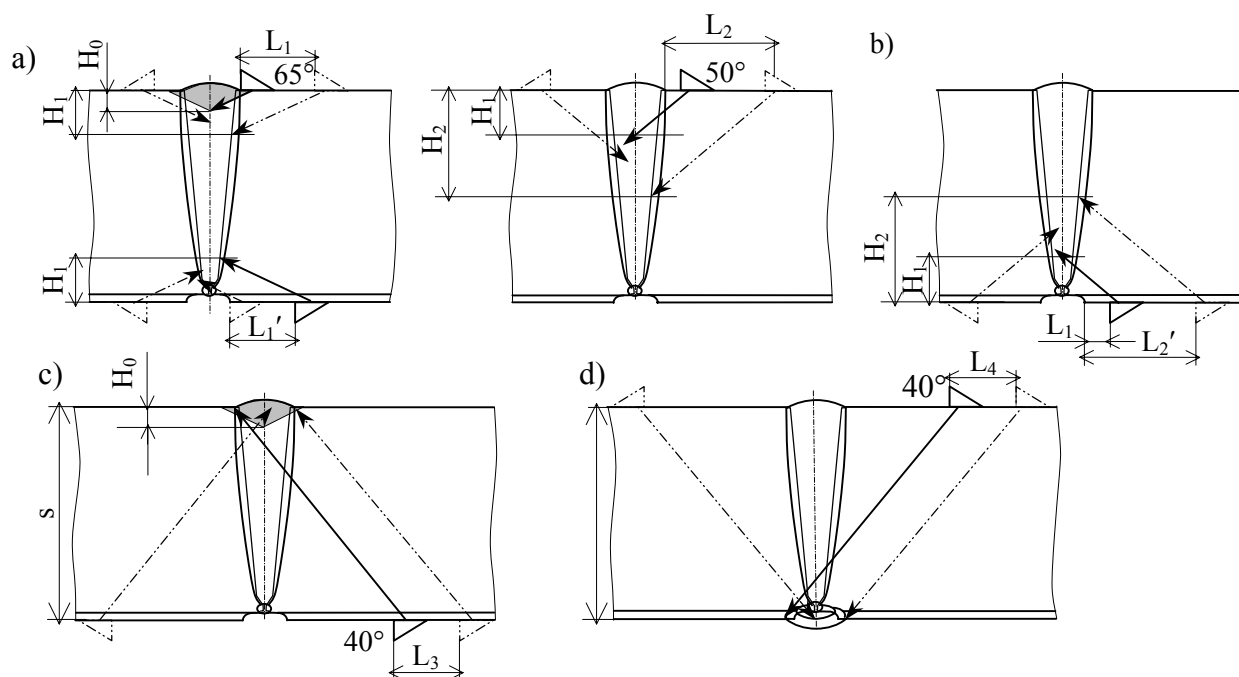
Schemes of the testing of a butt welded seam on 3 layers and buttering zone
